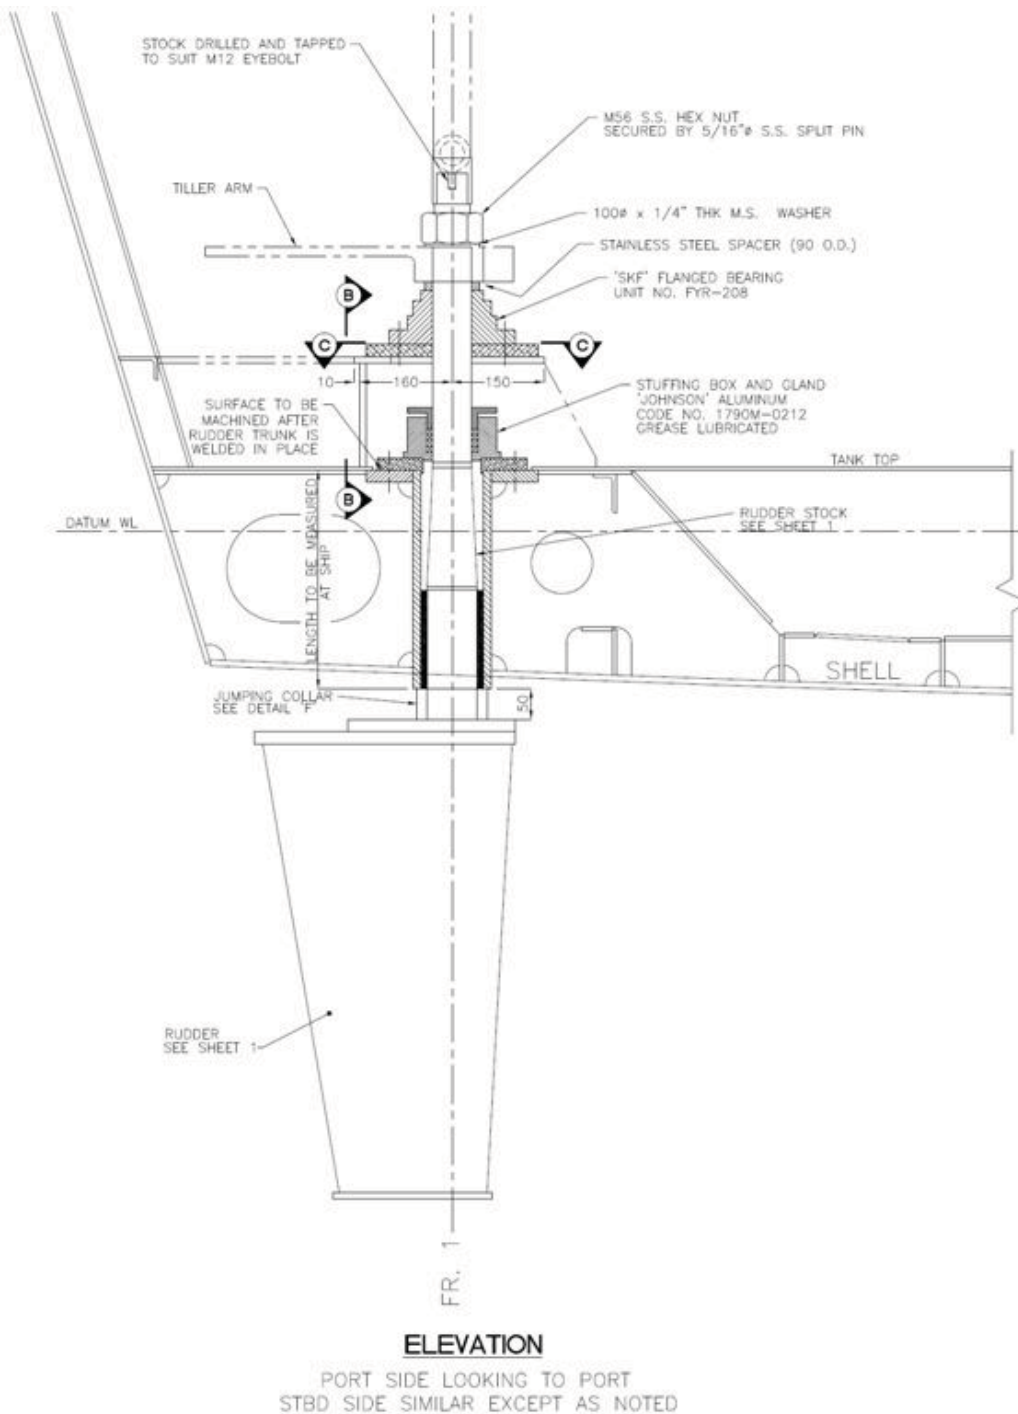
Fig. 4 Rudder Drawing – Elevation
